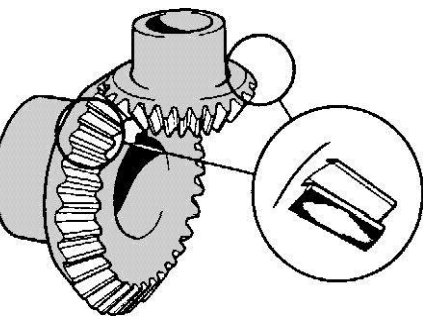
Shown above is normal mesh pattern for lower units using straight tooth gears.
